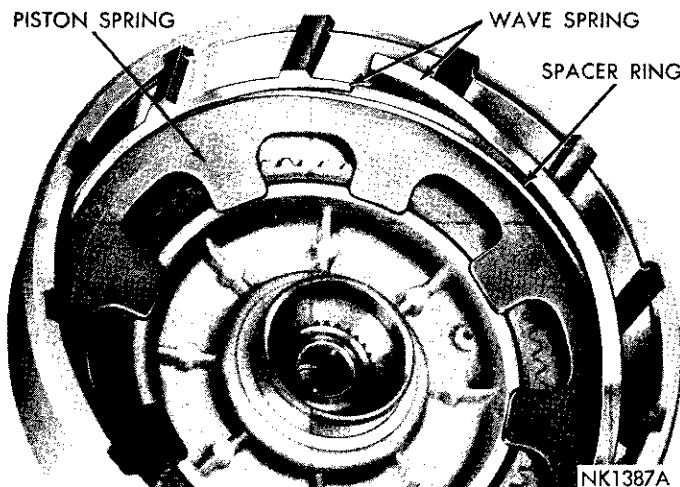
Installing Rear Clutch Spring, Spacer Ring and Wave Spring
